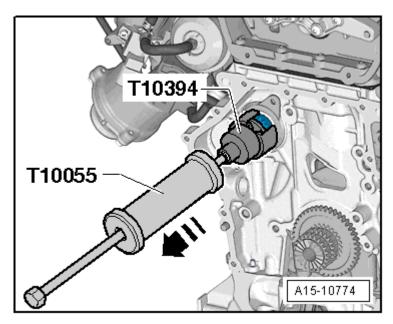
Identifying Installation And Operation Of Puller -T10055-
